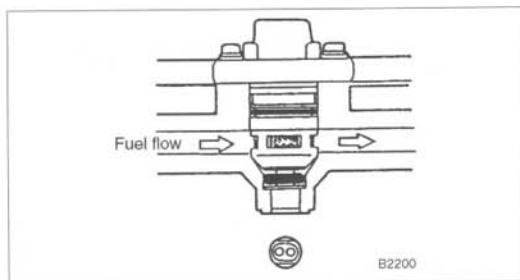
Side-feed injector on 2.5L V-6 circulates fuel through injector. Fuel flow carries away vapor caused by engine heat, improving hot starting.
